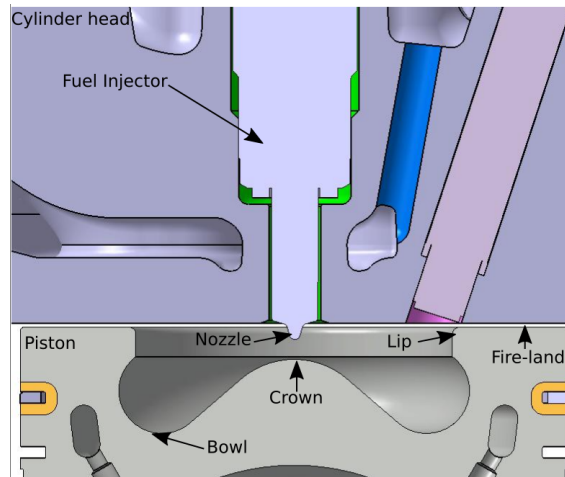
Cross-sectional view of 3D CAD model showing injector position and piston bowl geometry.
